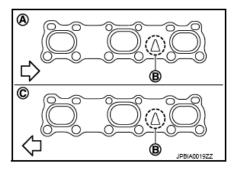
Identifying Exhaust Manifold Gasket Courtesy of NISSAN NORTH AMERICA, INC.
